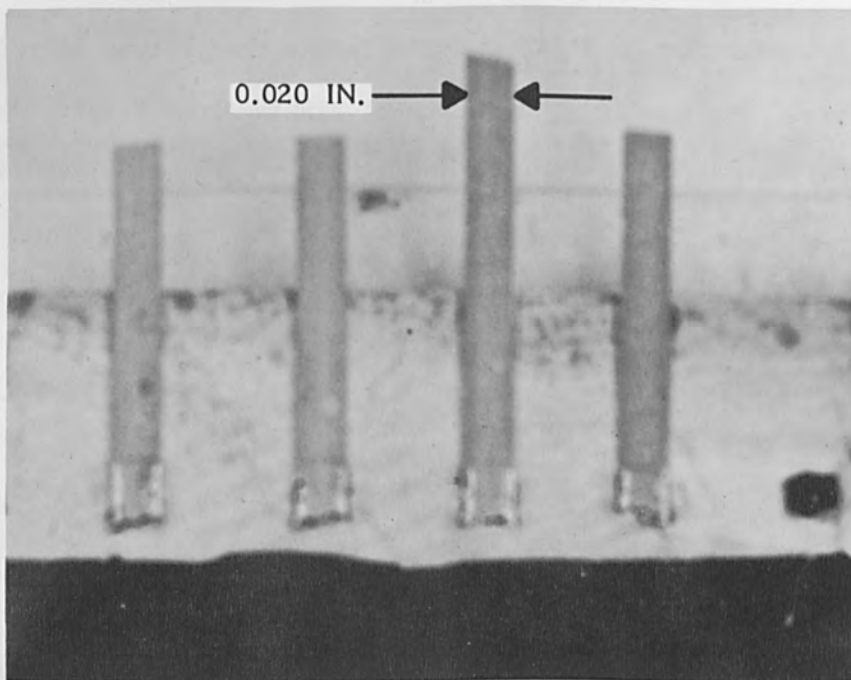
Gold and Kovar Leads Welded to Copper Plate with
